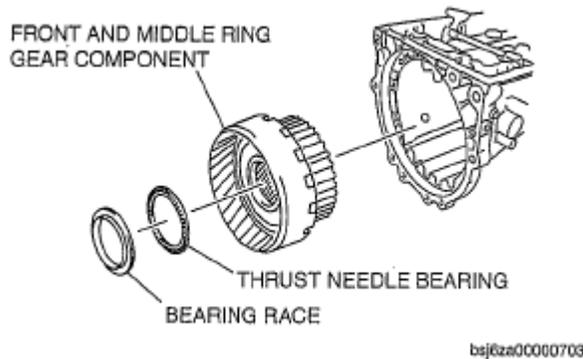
Identifying Front And Middle Planetary Gear Ring Component And Thrust Needle Bearing
